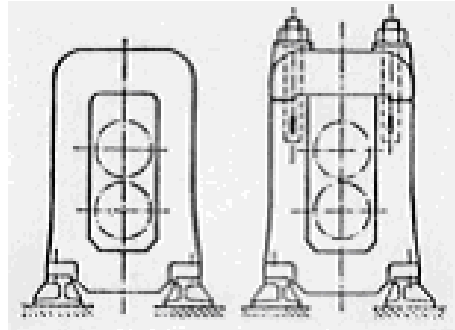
Closed-Top Roll Housing And Open-Top One.
